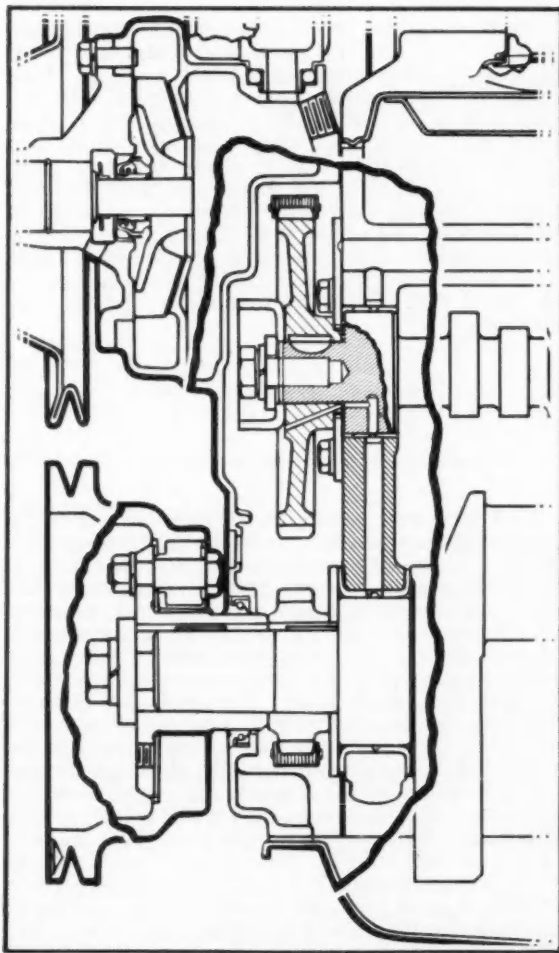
Fuel pump eccentric and timing chain lubrication.
